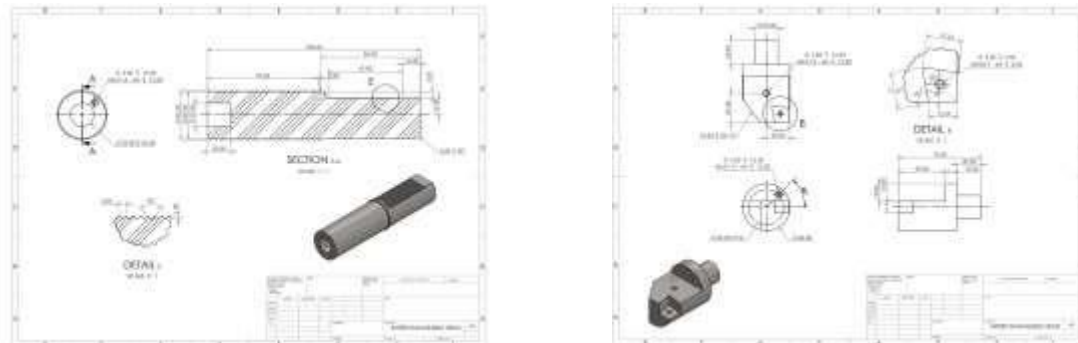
(A) *Design Tool Holder* CNC Type 1, (B) *Design Tool Holder* CNC Type 2
